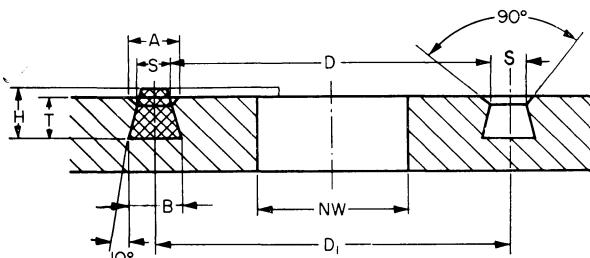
Dimensions for trapezium cross section gasket seals (Table 3.38)
